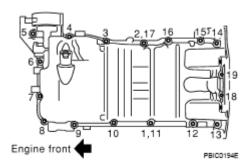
Identifying Oil Pan Mounting Bolts Loosening Sequence
